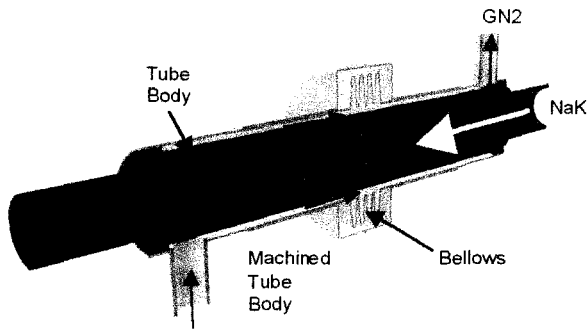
Plugging heat exchanger cross section, with bellows section shown shortened for simplicity.
